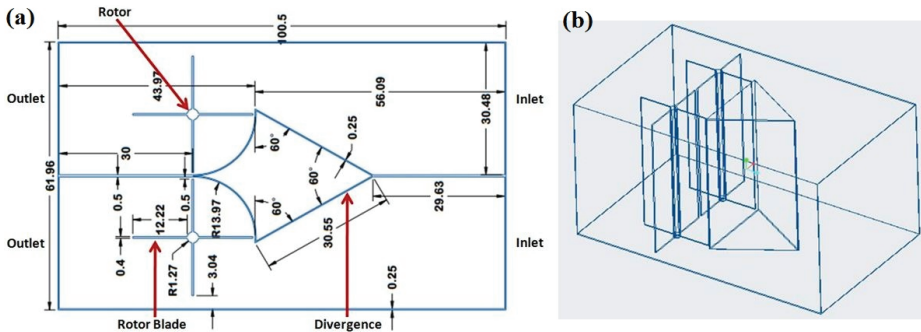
Design of the prototype model: (a) 2D design along with dimensions, (b) 3D wire frame view.
